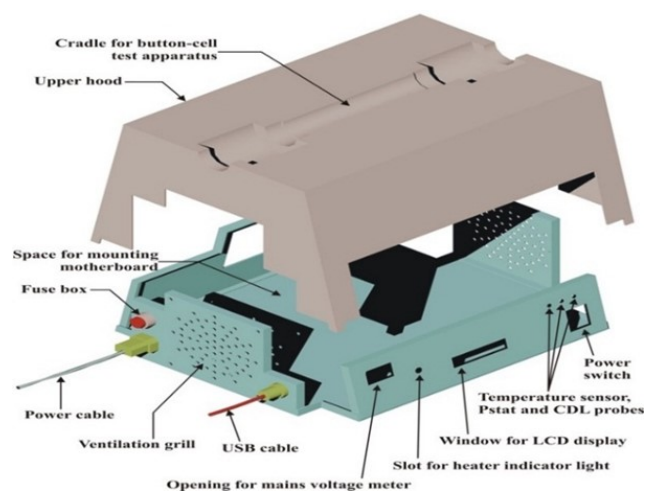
Exploded assembly of Test Station (Arema *et al.* 2015)
